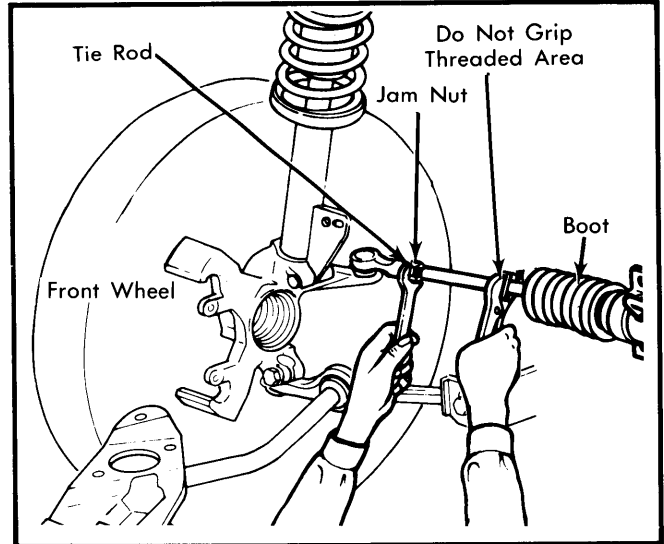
Toe-in Adjustment on Front Wheel Drive Vehicles
